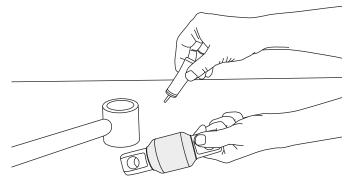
Lubricate Rod & Bush with Assembly Lubricant
